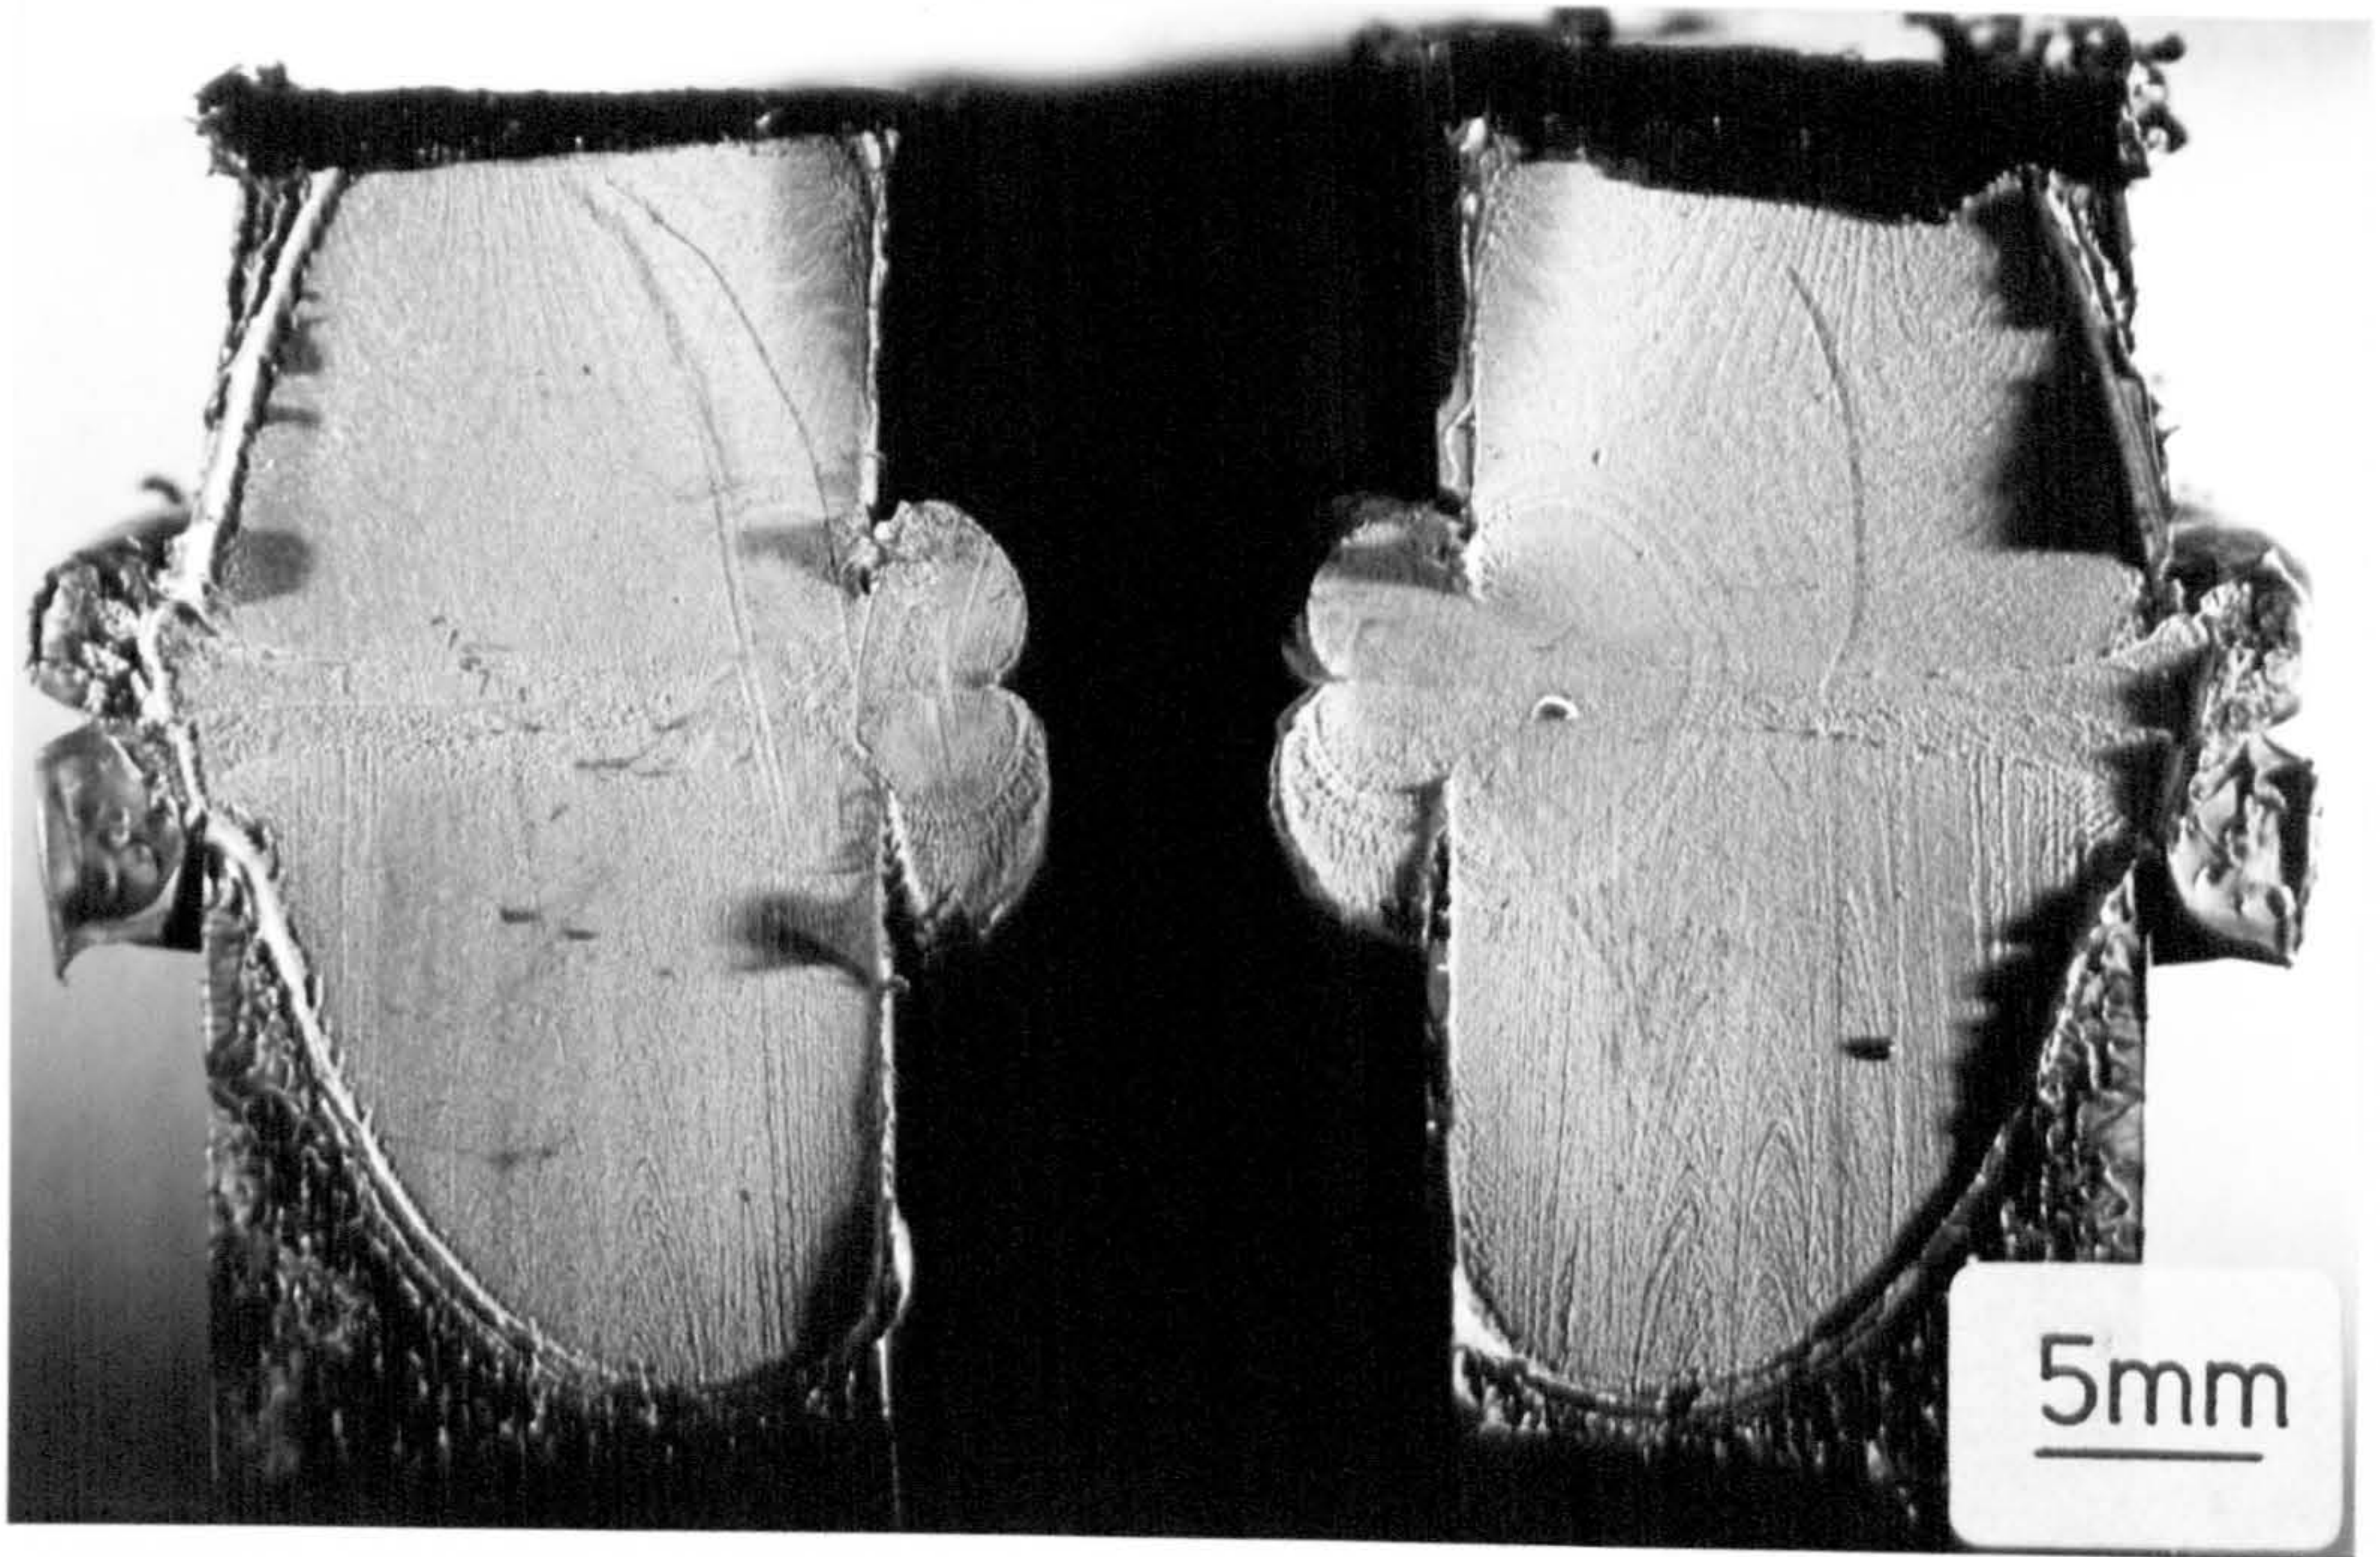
B2 type 1 fracture surface in HDPE 1 pipe.
